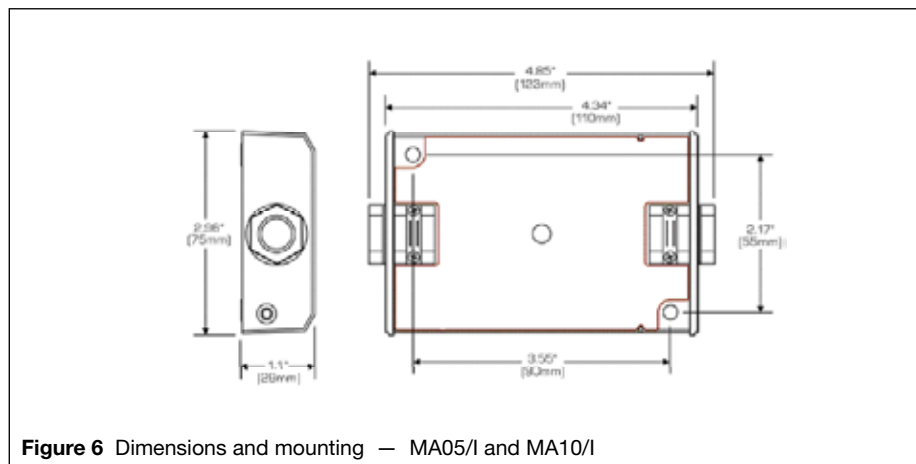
Dimensions and mounting — MA05/I and MA10/I
